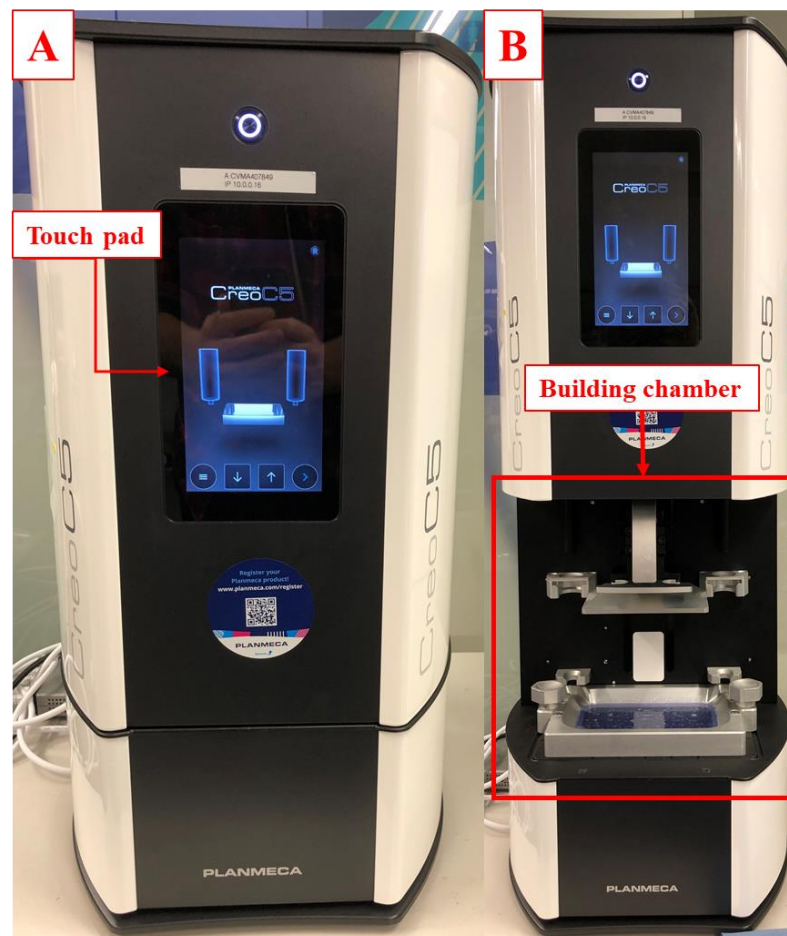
Creo C5 resin printer, on left side (A) printer is closed as during printing and on the right (B) the printer is opened for operations.
